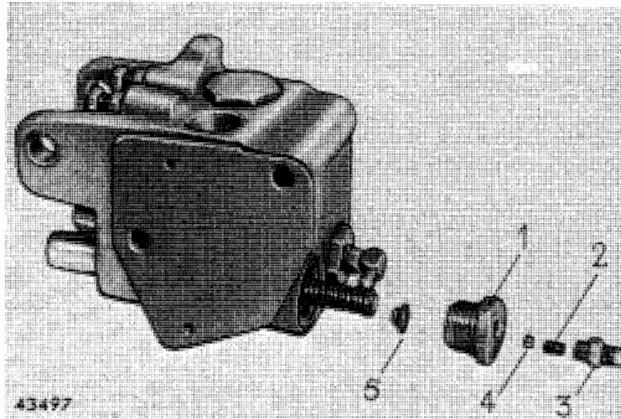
Removing Balls, Valve Seats, Springs and Retainers of Brake Valve and Cylinder
